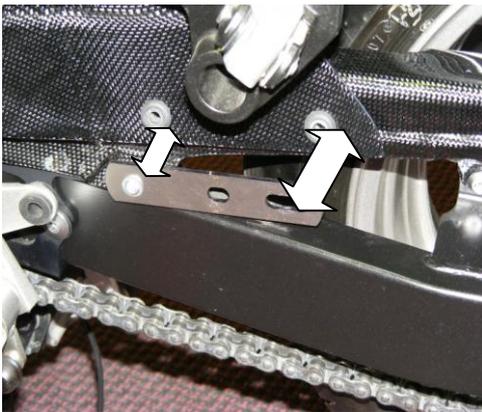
Left Hand Side – shows position of bracket underneath hugger.
